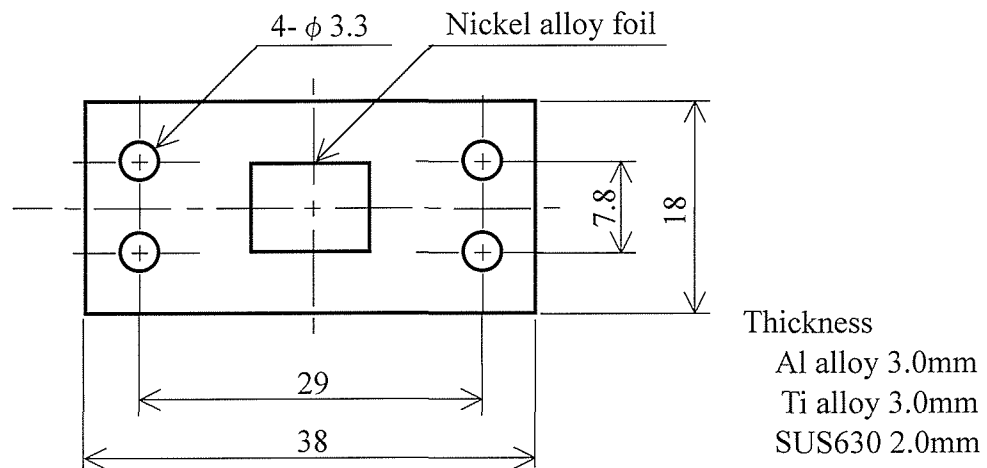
Geometry and dimensions of specimen for plane bending test
